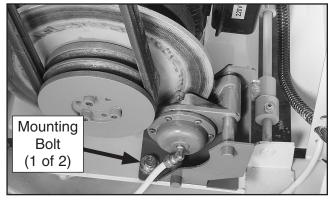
Location of disc brake assembly mounting bolts (1 of 2 shown).
